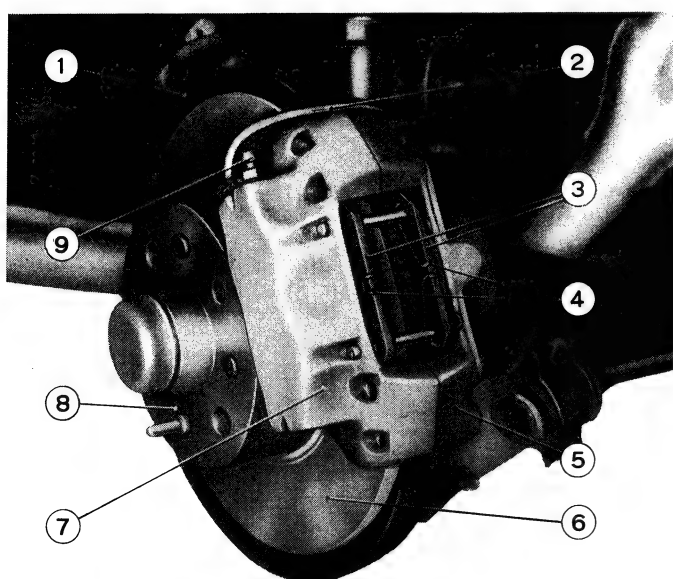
Right front wheel disc brake assembly - 1500 Cabriolet.
